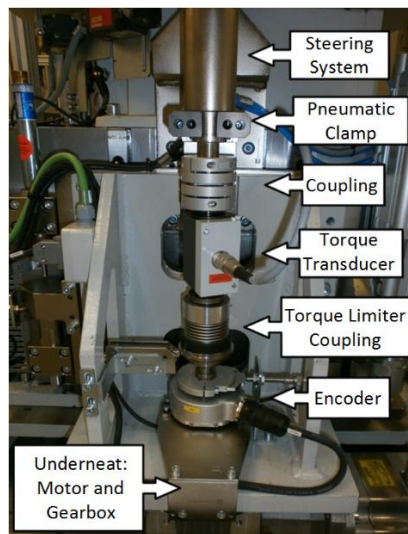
Machine that performs the end-of-line test composed by a servomotor, a gearbox, an encoder, a torque transducer and a pneumatic clamp to hold the intermediate shaft of the steering system.
